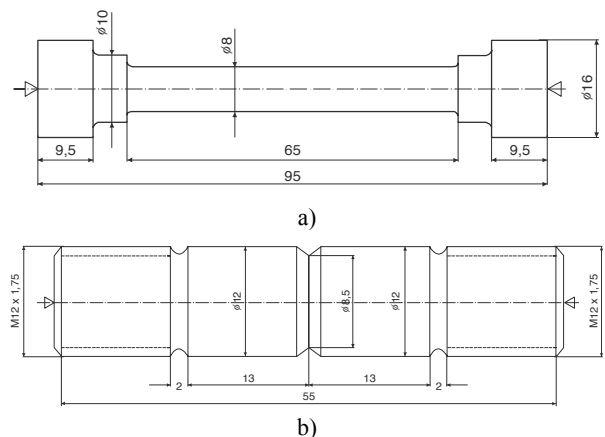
Dimensions of: a) plain tensile specimens and b) sharp notched tensile specimens
